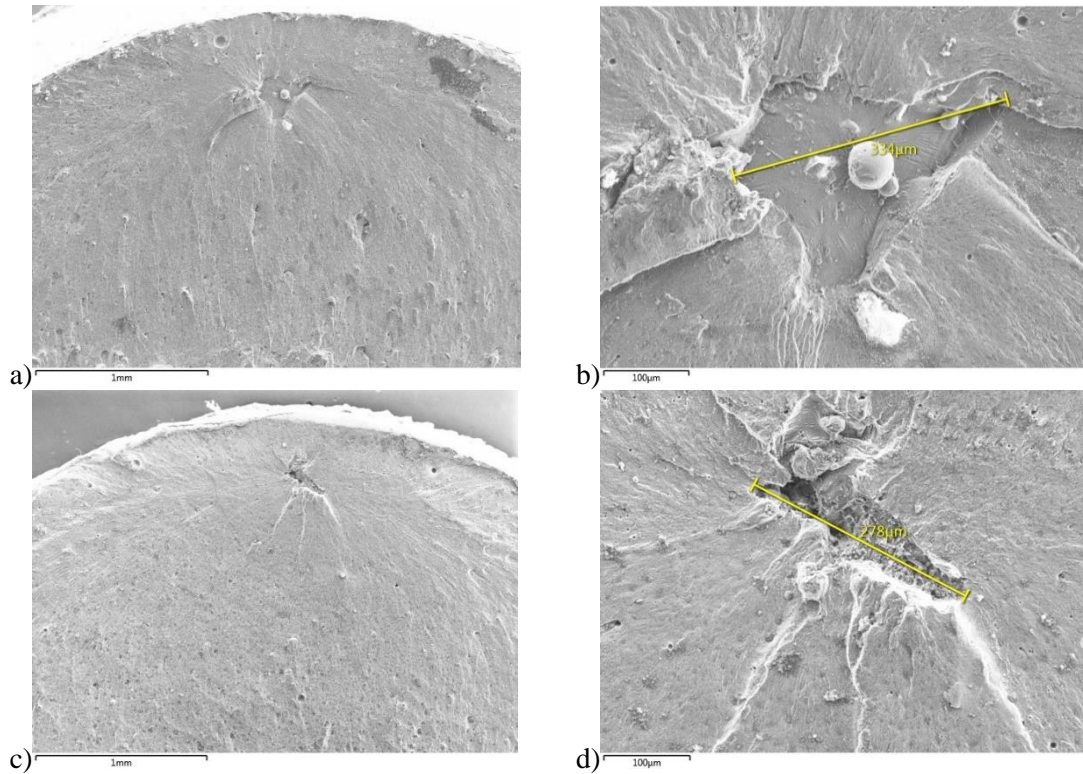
indication of the fatigue propagation under the surface noticed on fracture surfaces of shot peened specimens.
